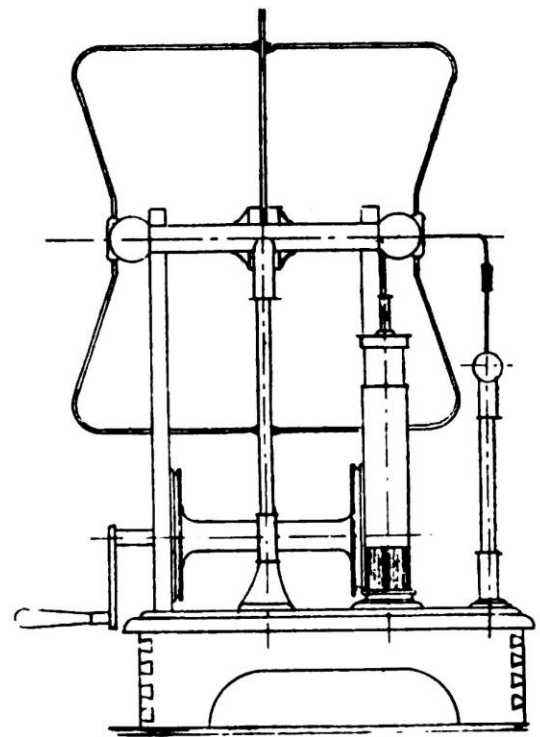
END ELEVATION OF WIMSHURST MACHINE (Left-hand End).
